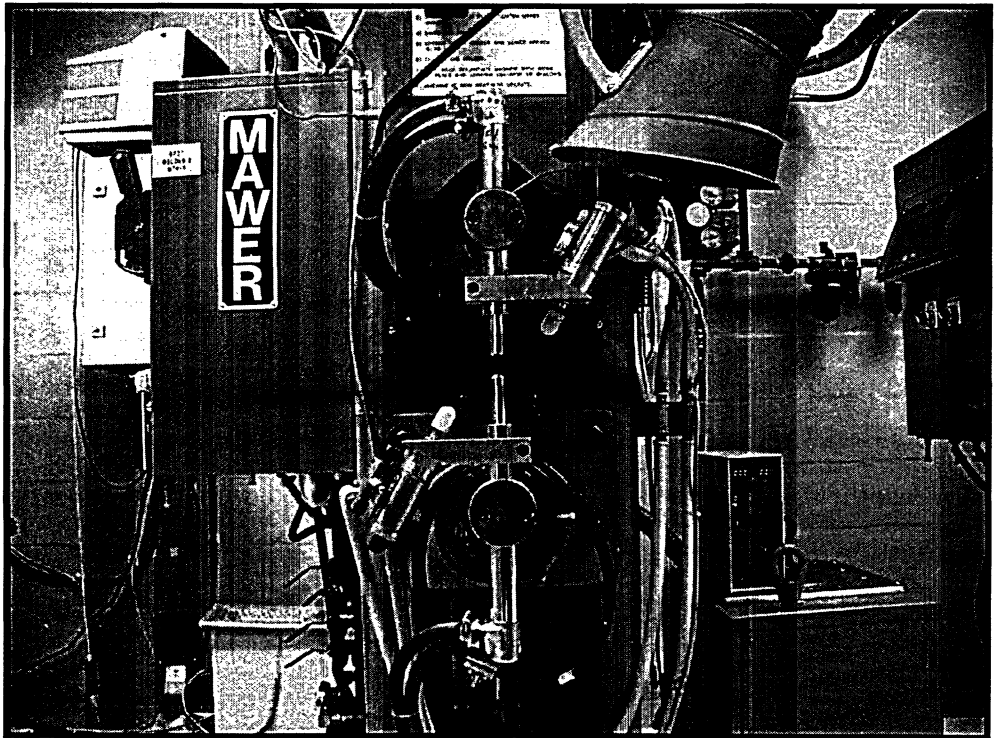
A 75 kVA AC Spot welding machine
